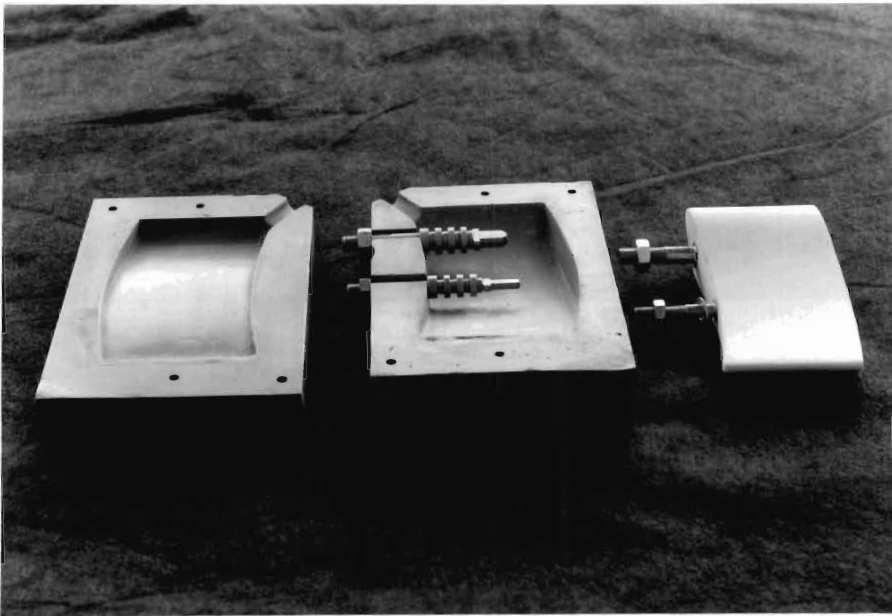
BLADE CASTING MOULD AND BLADE
